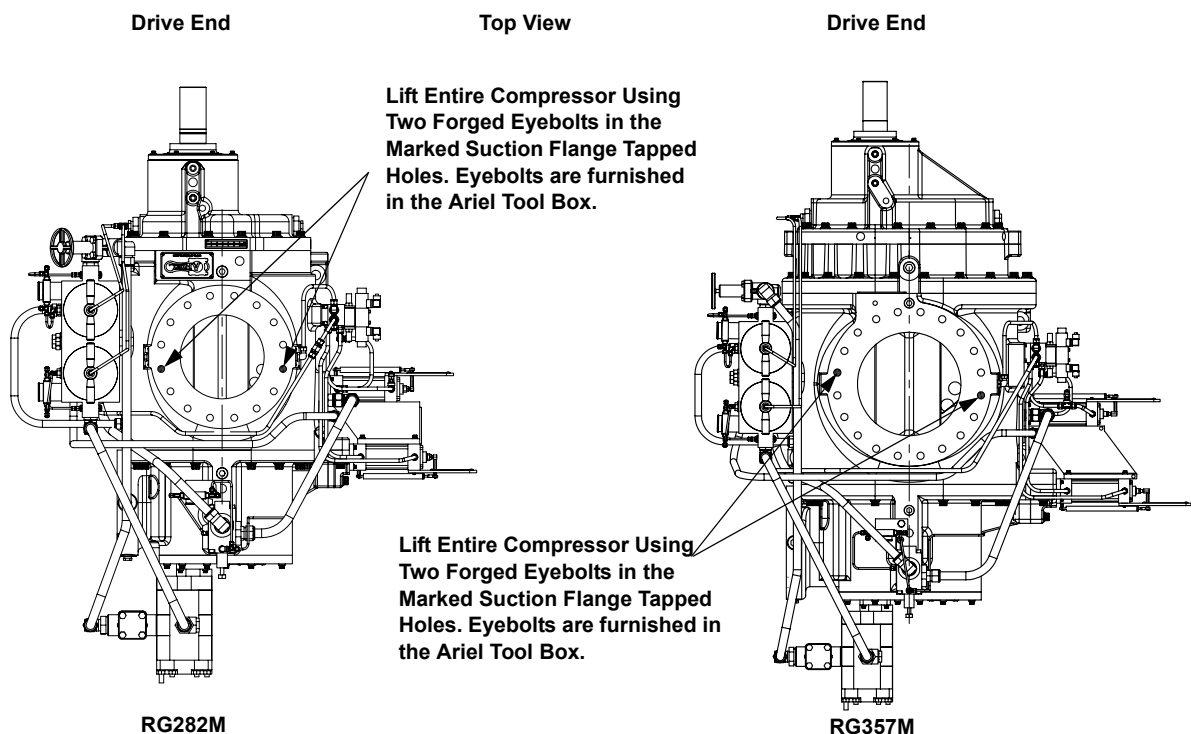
LIFTING POINTS FOR COMPRESSORS WITHOUT BELL HOUSING
